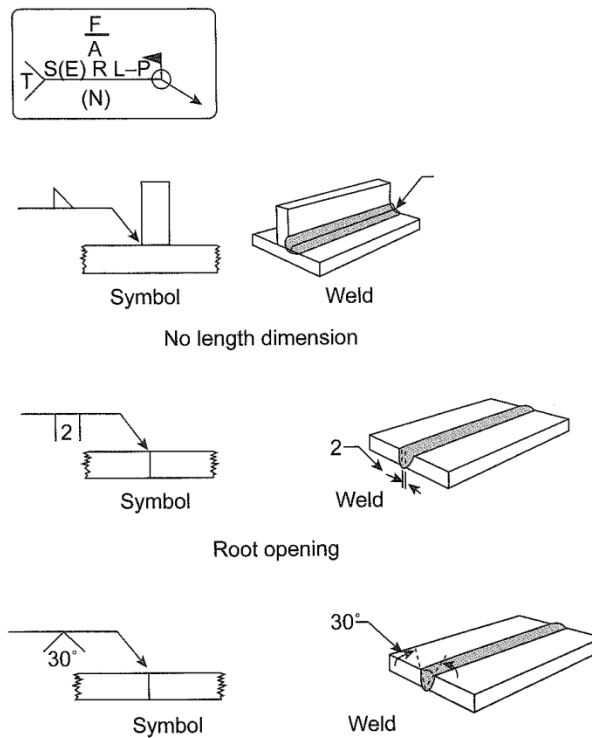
Applications of dimensions in the welding symbol
